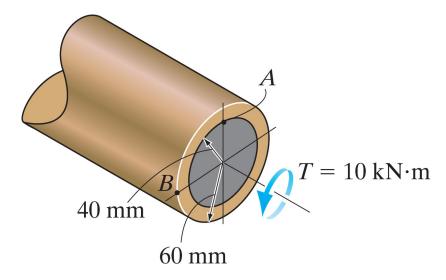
A hollow circular shaft with outer radius of 60 mm and inner radius of 40 mm. Point A is on the inner surface, Point B is on the outer surface.
